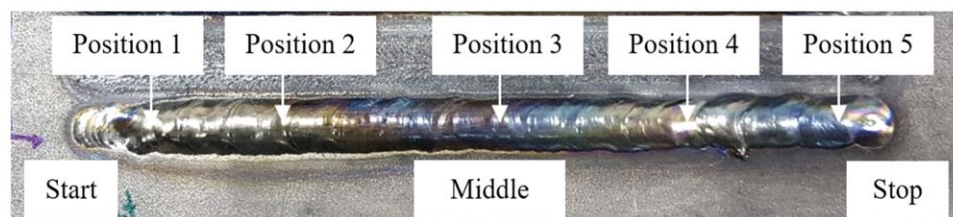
Positions for measuring bead height and bead width of deposited weld.
